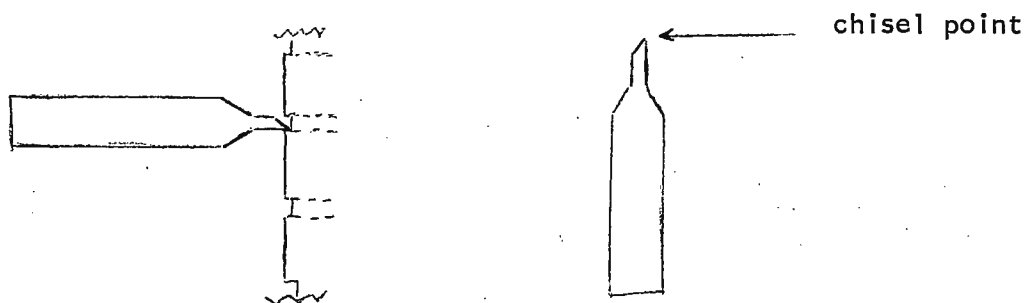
Diagram shows cutting tool and the method for undercutting insulation between sanded down windings. The tool is carefully drawn across the insulation in a horizontal direction.
